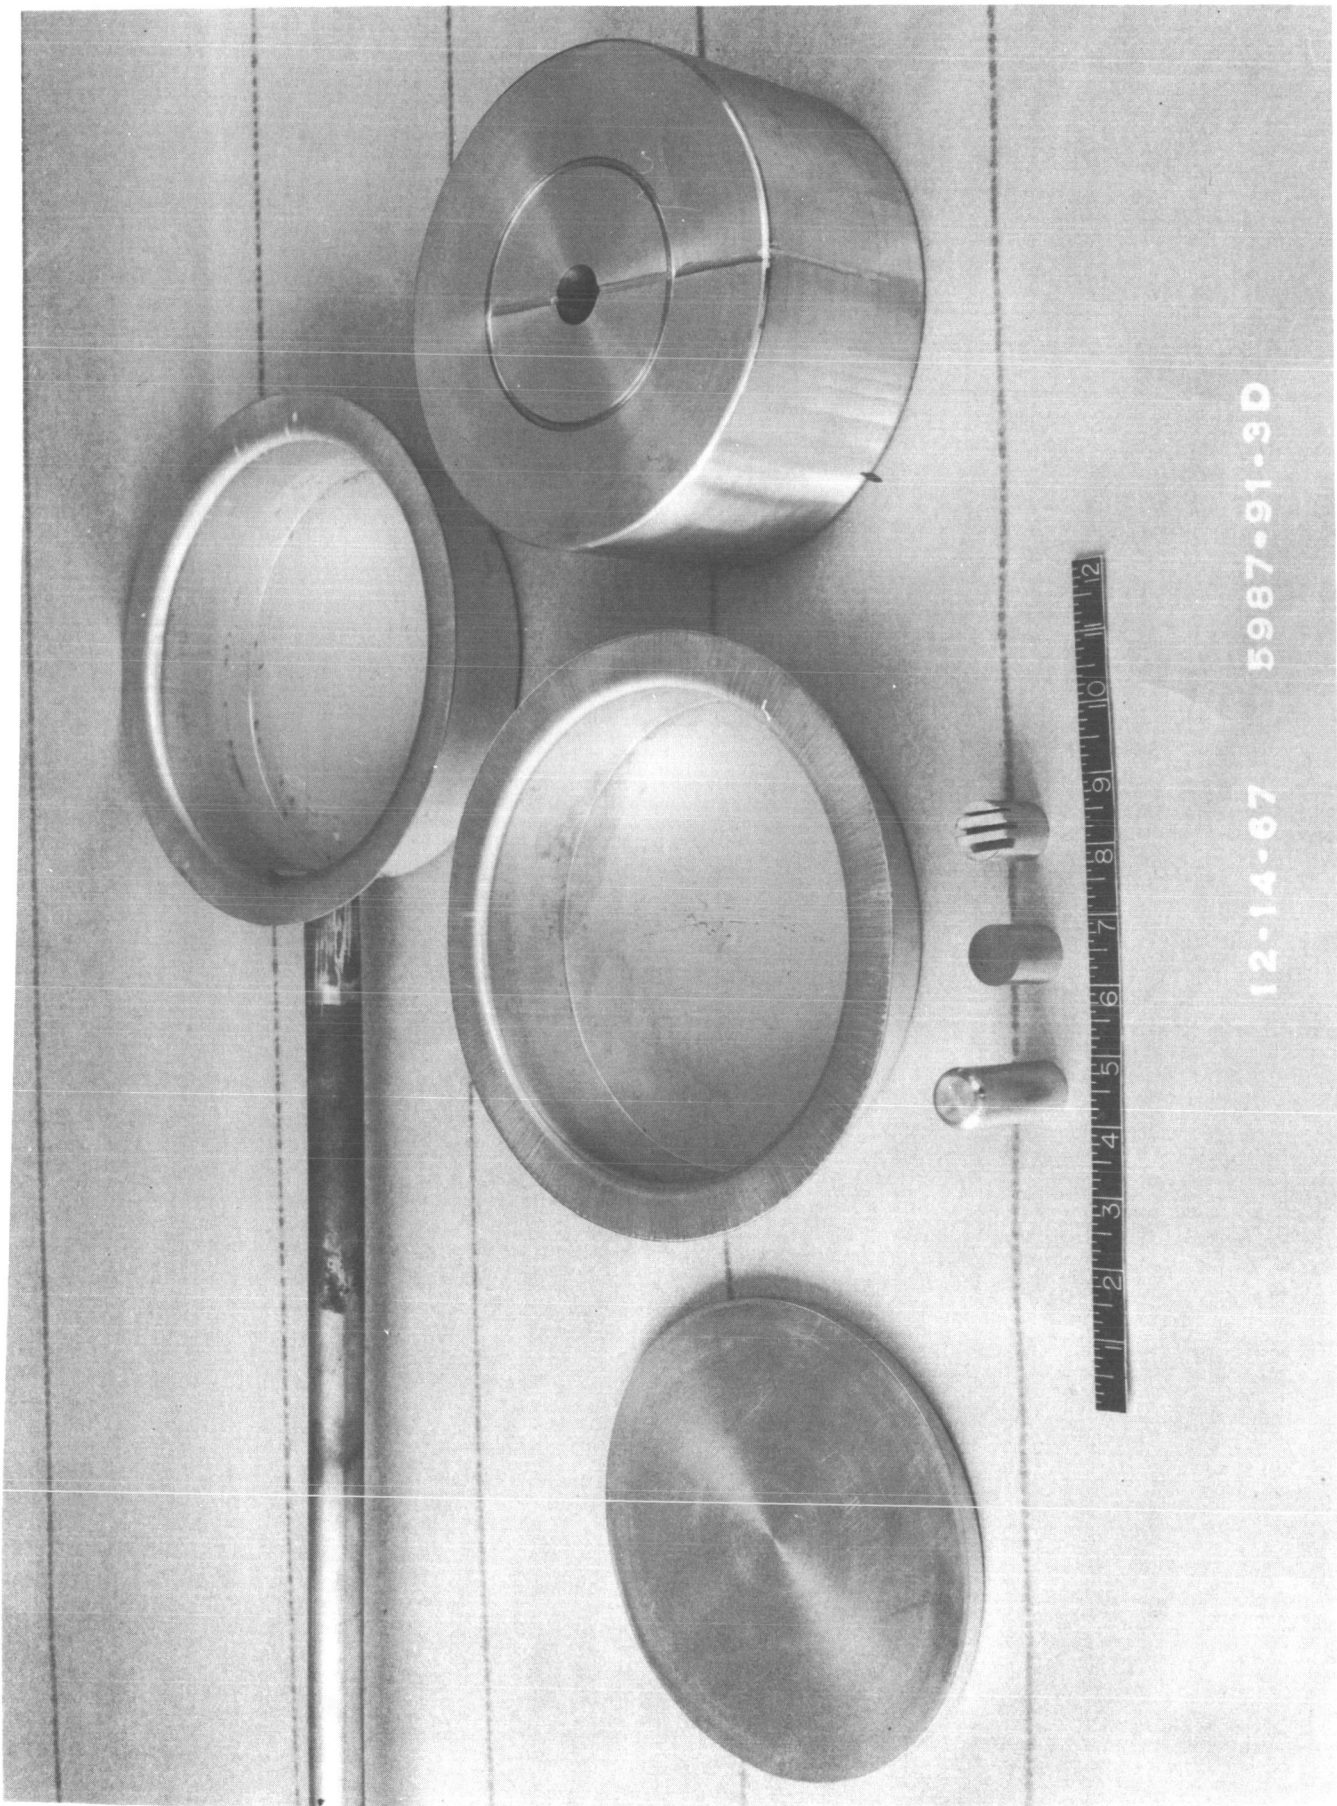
Disassembled View of 7/8 Inch Specimen and Tooling
